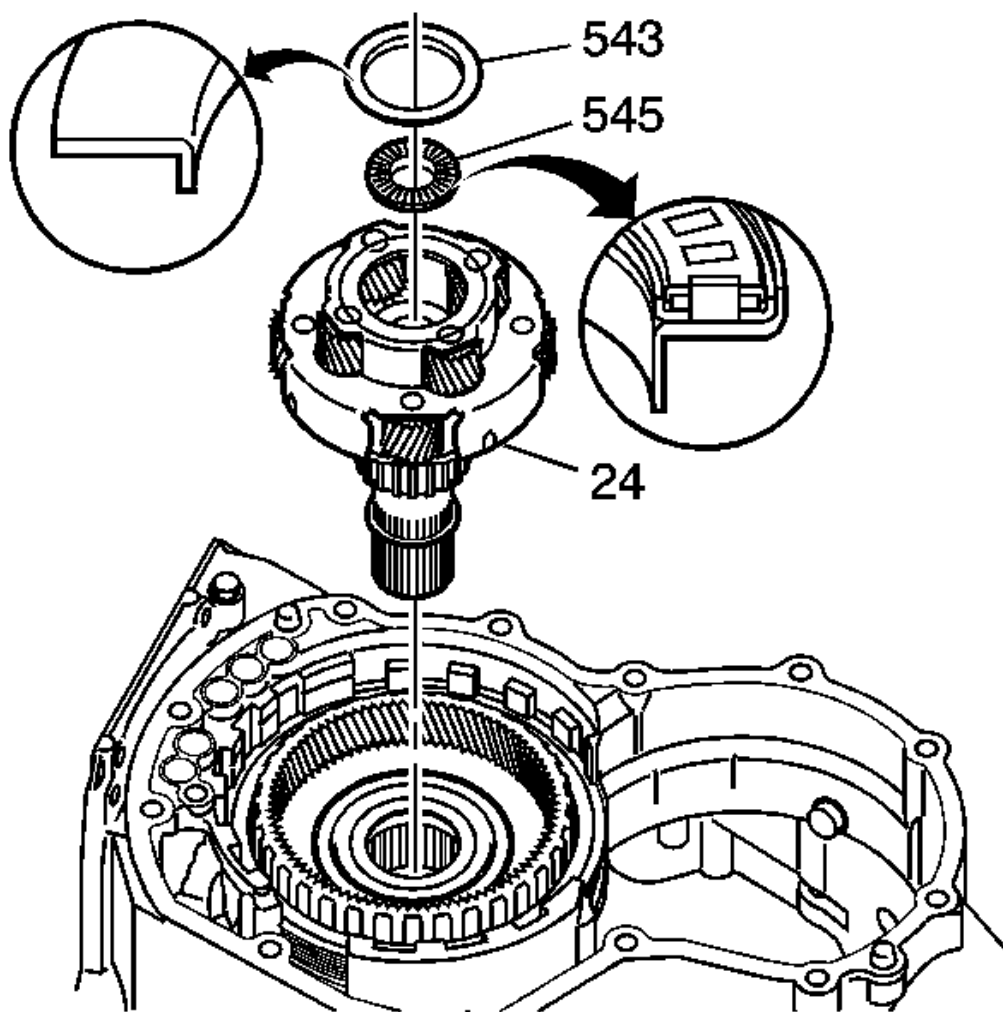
A/Trans Case Assembly - Control Valve Body Side
